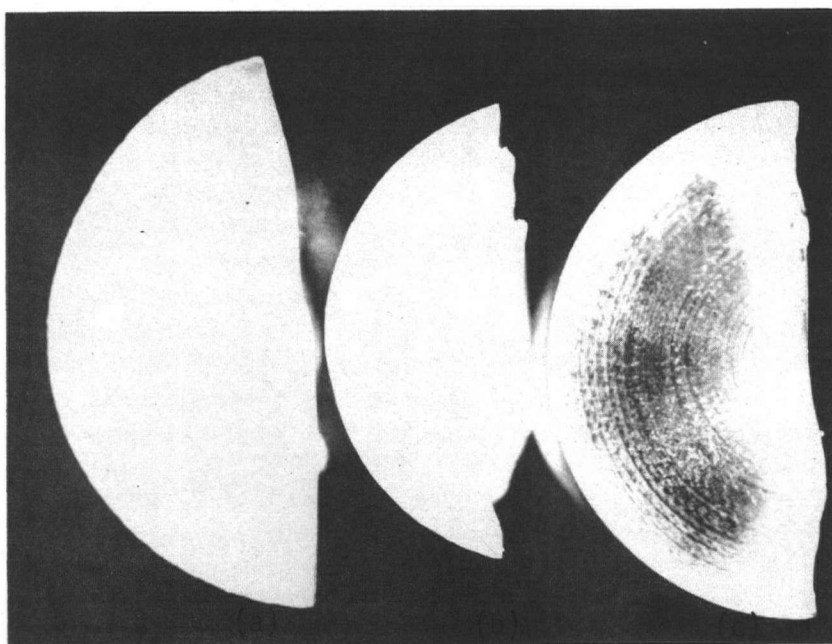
TENSILE FRACTURE OF CYLINDRICAL SPECIMENS
